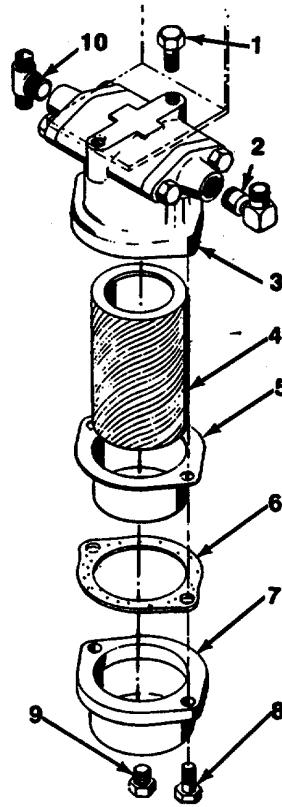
Main Air Supply Filter, Disassembly and Rassembly.
